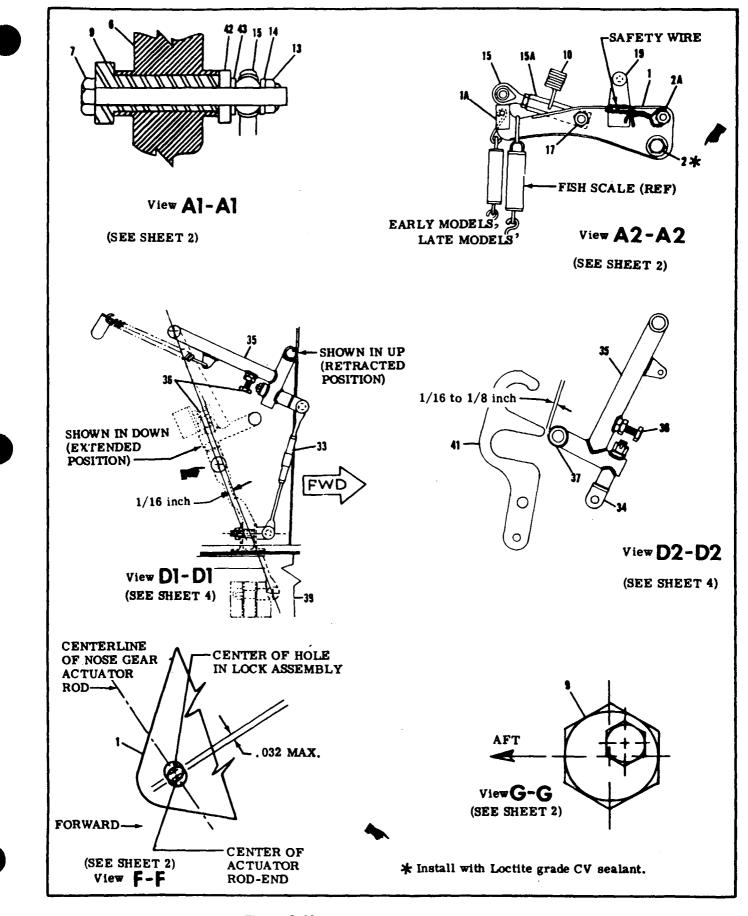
Nose Gear Rigging (Sheet 4 of 7)
